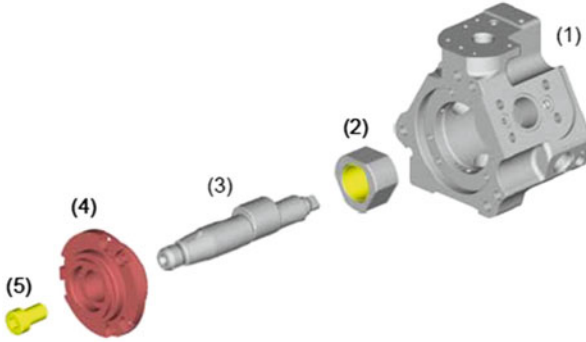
Body and components to be assembled. Pump body (1); polygonal ring (2); eccentric shaft (3); flange (4); screw (5)
